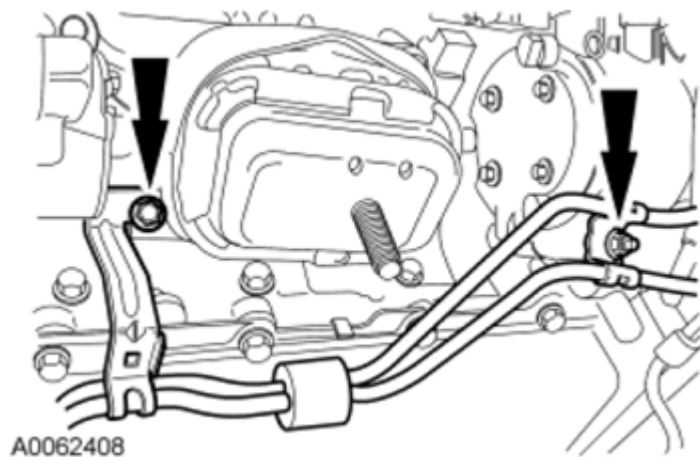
Locating Transmission Cooler Tubes Mounting Bolt And Nuts
